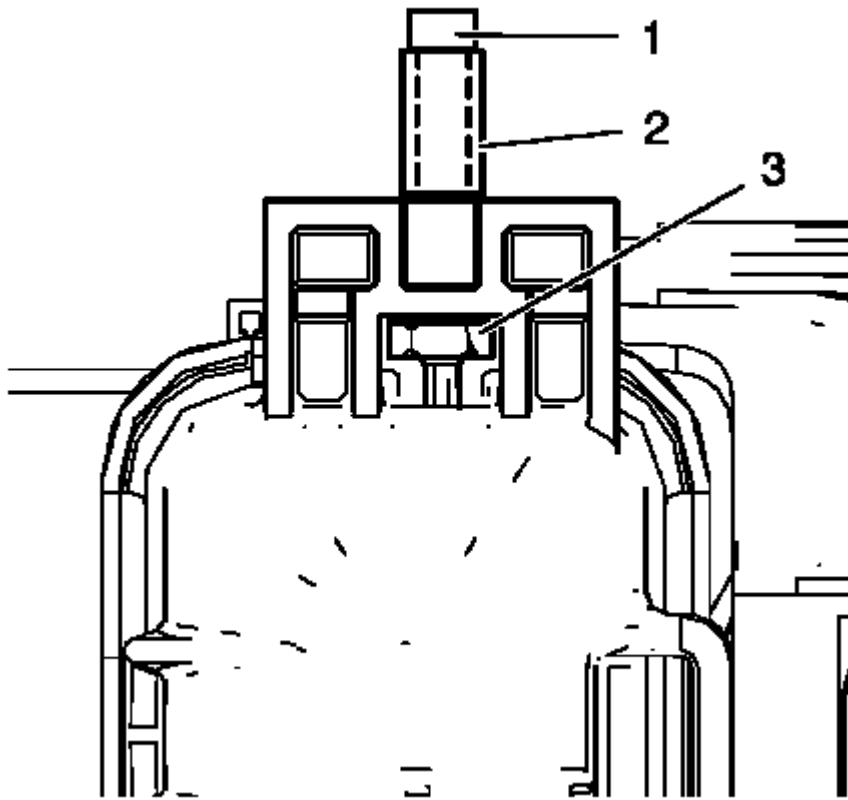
Radiator Mounting Pin, Nut And Bolt
